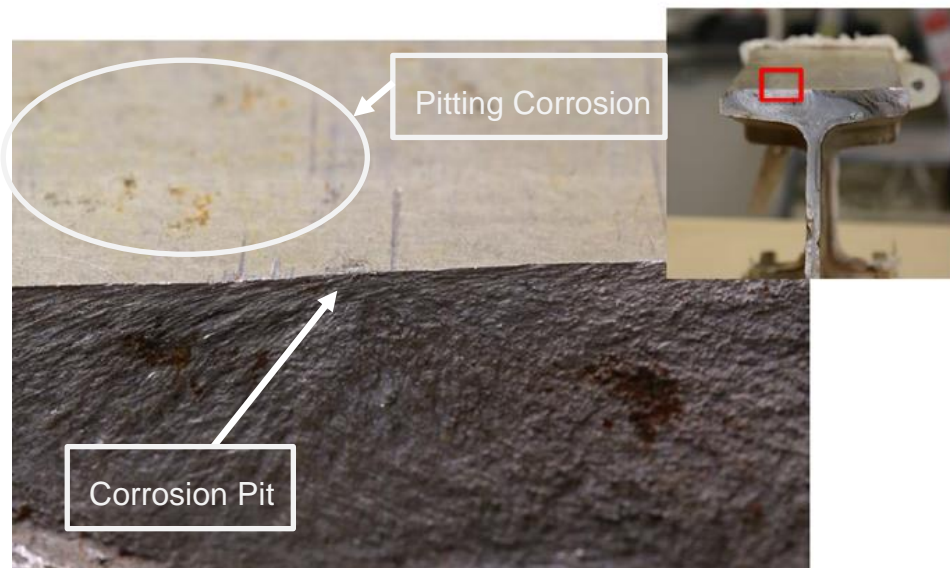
Photograph of Cessna T210M Fractured Carry-Through Spar OUTBD Fracture Surface
